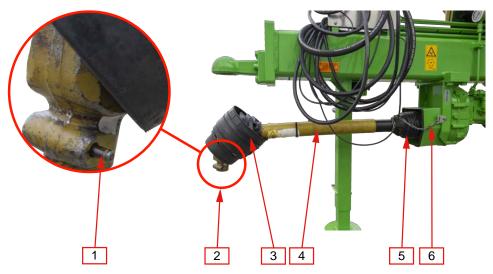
Mount the cardan shaft (example on a slip-on pump)
